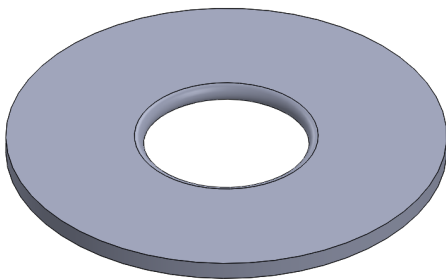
InnerCam's spring washer (Solidworks™ view)
